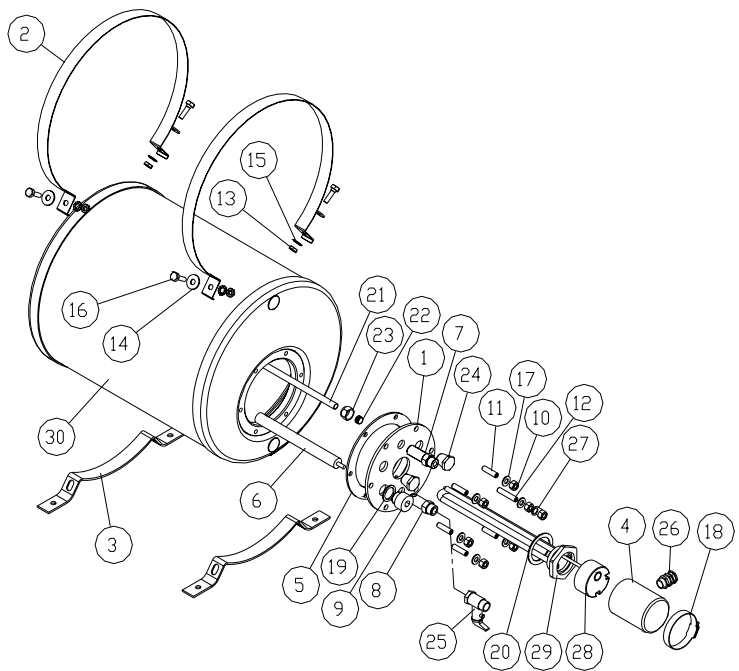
exploded view models BB.22....SS / BB.30....SS / BB.45....SS / BB.60....SS
